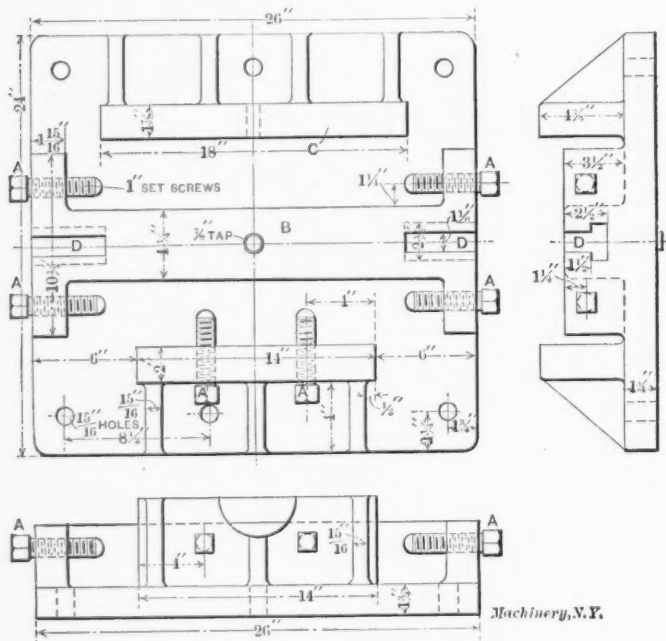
Jig for Boring Boxes on a Horizontal Boring Mill.
